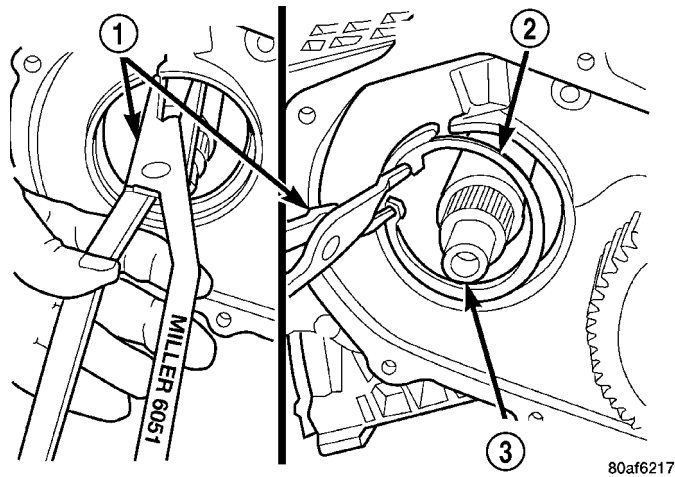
Install Transfer Shaft Bearing Snap Ring
